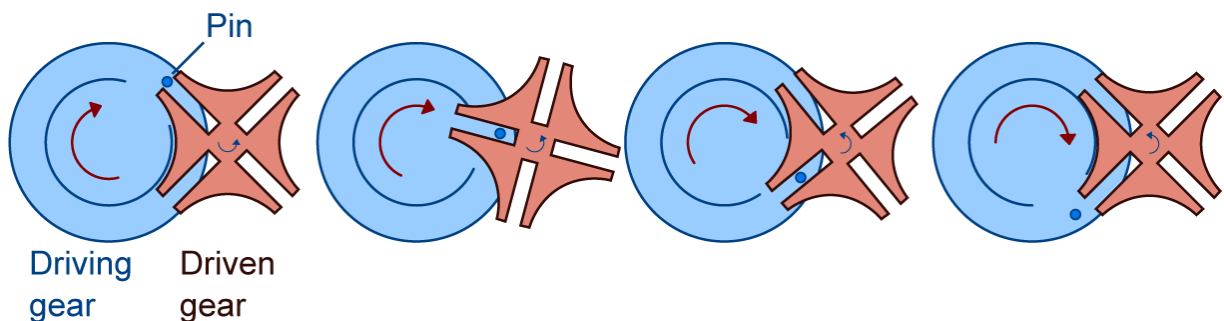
Operation of Geneva drive. A driving gear with a pin engages with the slot on a driven gear and advances the driven gear by “one step” of 90° for each full rotation of the driving gear. This diagram is adapted from [81].
